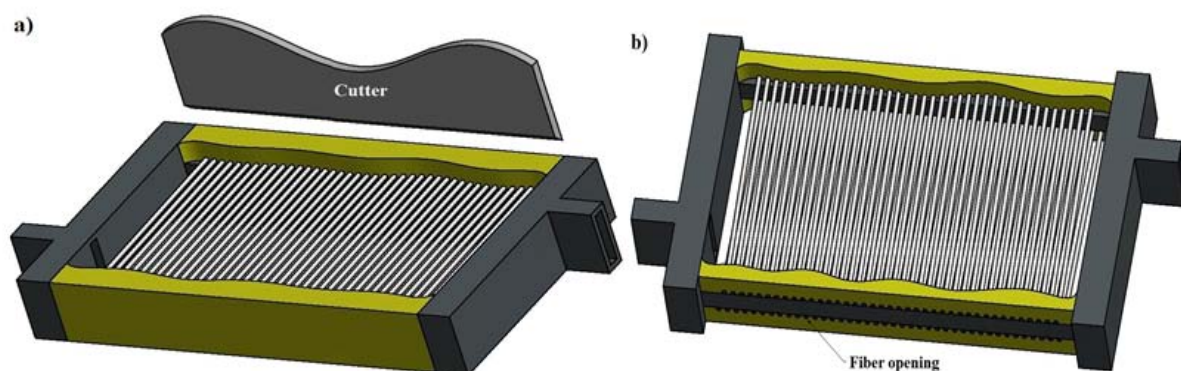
Horizontal frame cutting for making fiber opening: a) Before cutting; b) After cutting.
